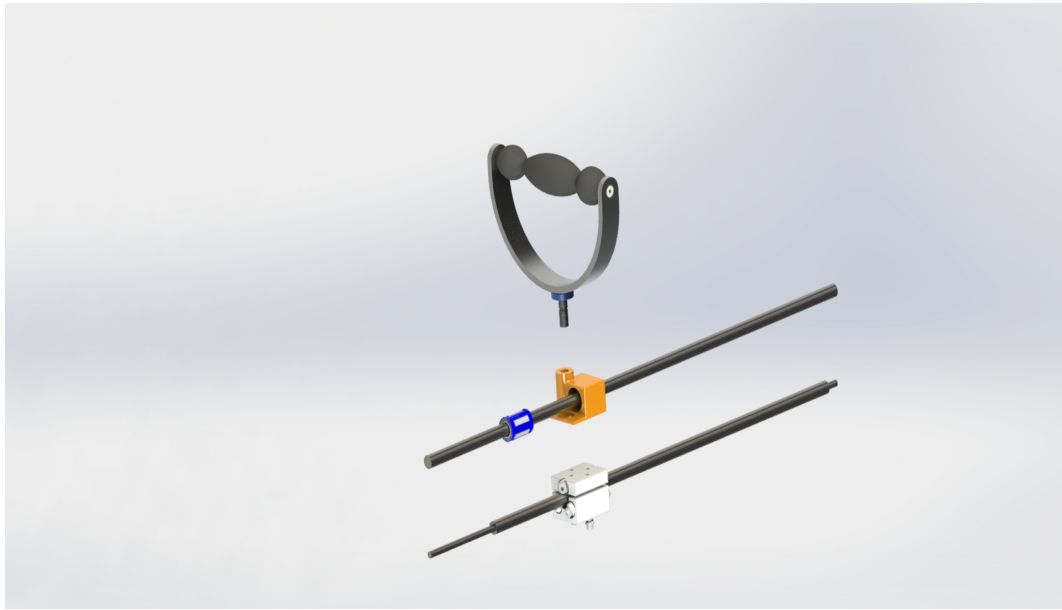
Exploded view of handle, handle mount, linear ball bearing, linear shaft (upper) shaft, rotary shaft (lower) and Roh'Lix
